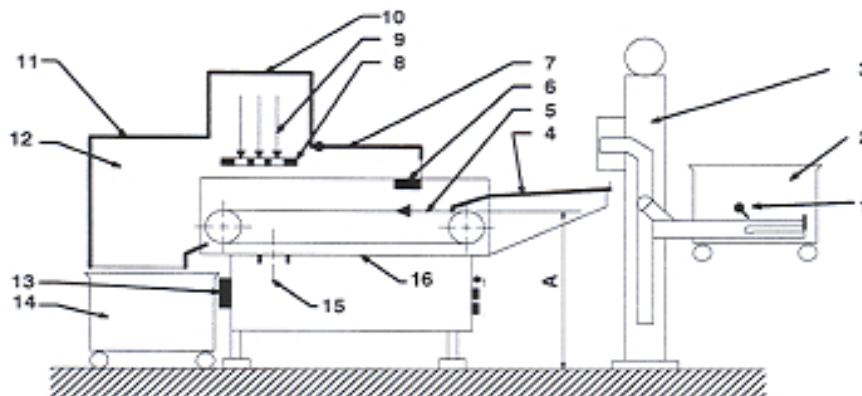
Construction of a curing injection machine with needle bar, holding down clamp, infeed and outfeed device and transport car
